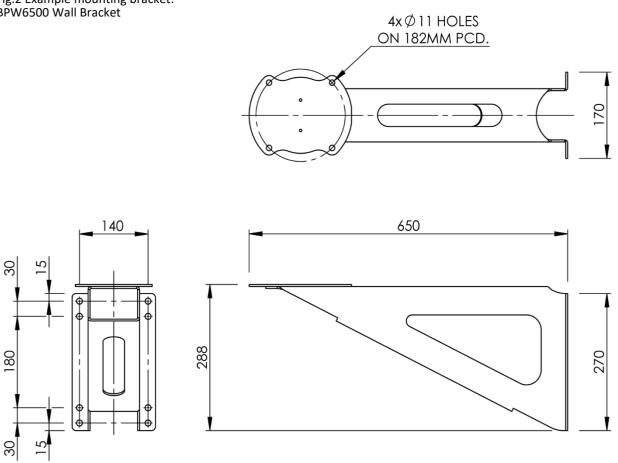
Example mounting bracket: BPW6500 Wall Bracket
